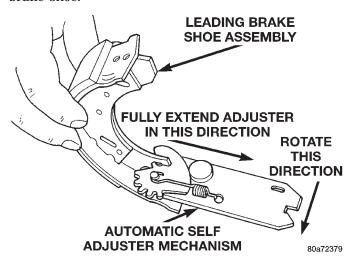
Removing Adjuster Mechanism From Leading Brake Shoe
